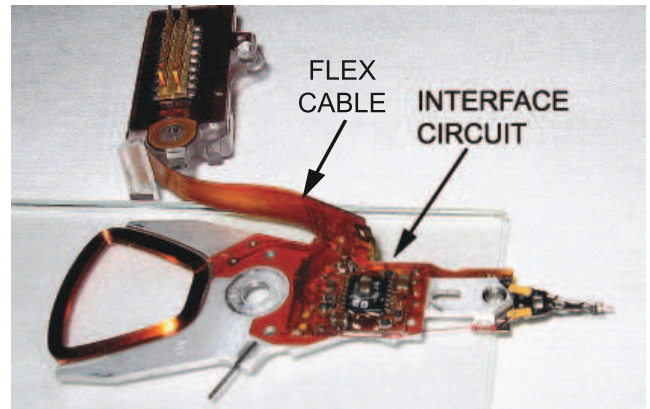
The E-block and suspension assembly with interface circuit installed.
